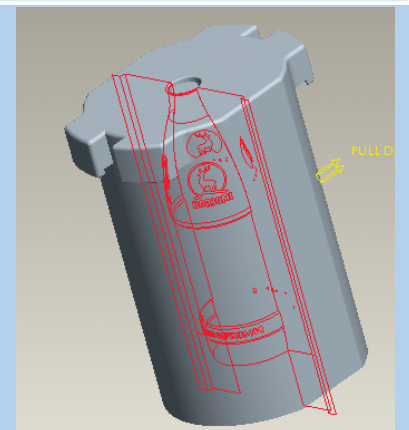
Copying the bottle face and extending to split the remaining workpiece into side pieces.
